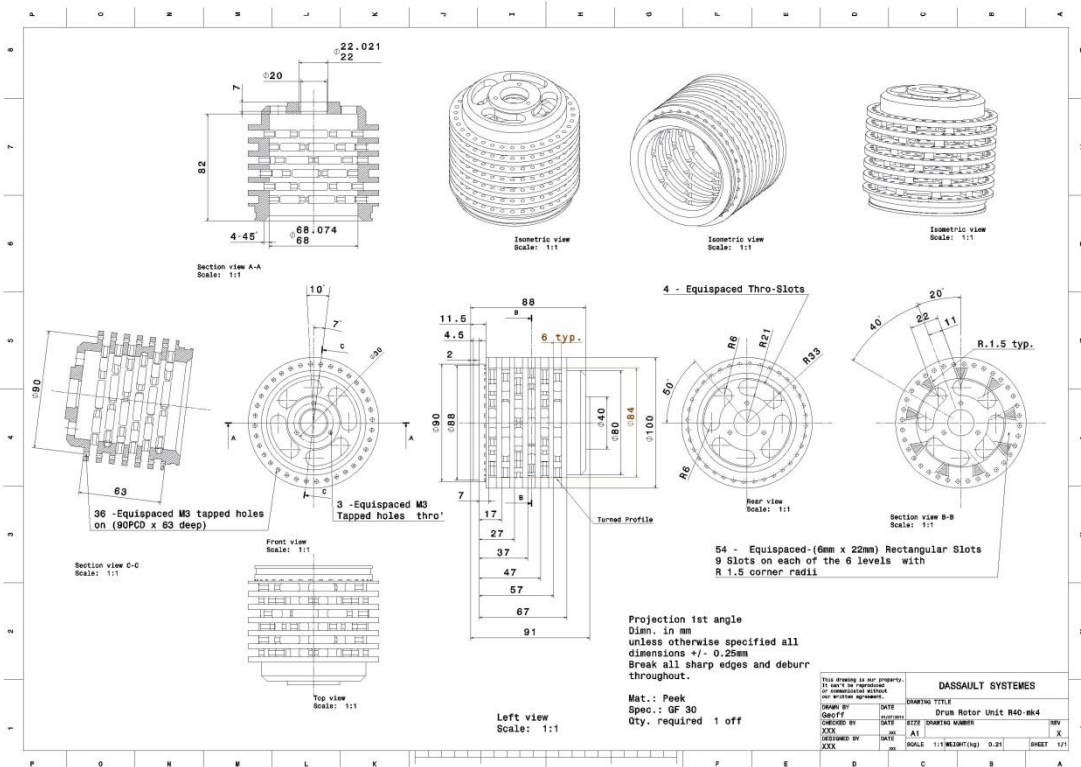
A –Drum Rotor Unit: Mark II Thermal Motor
